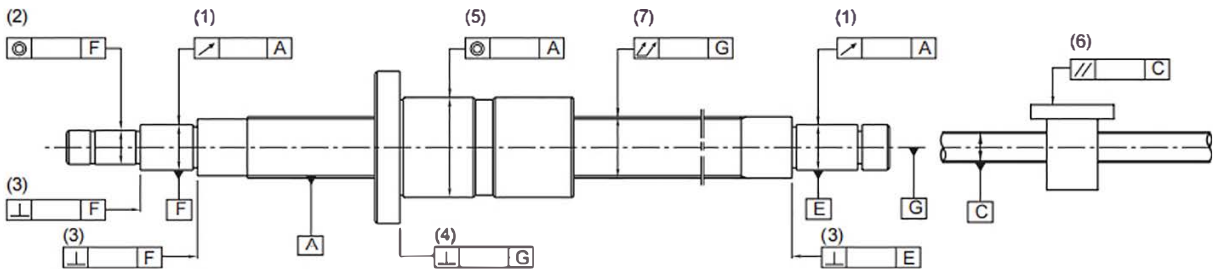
Mounting Accuracy and Tolerance
